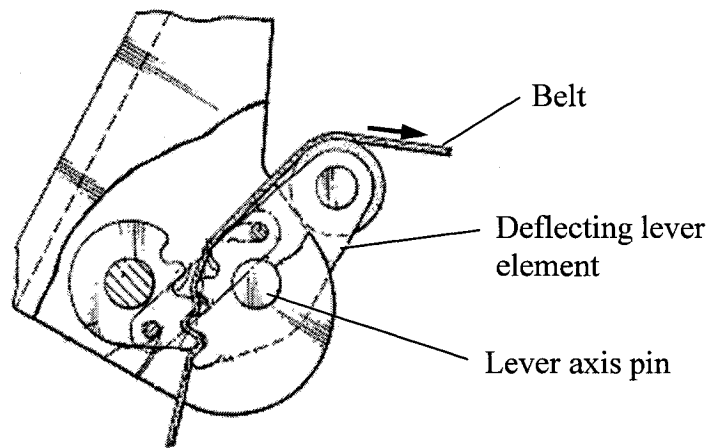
Drawing of a seatbelt braking mechanism that inspired the design of the orthotic knee joint that is the focus of this thesis (adapted from [75]).
